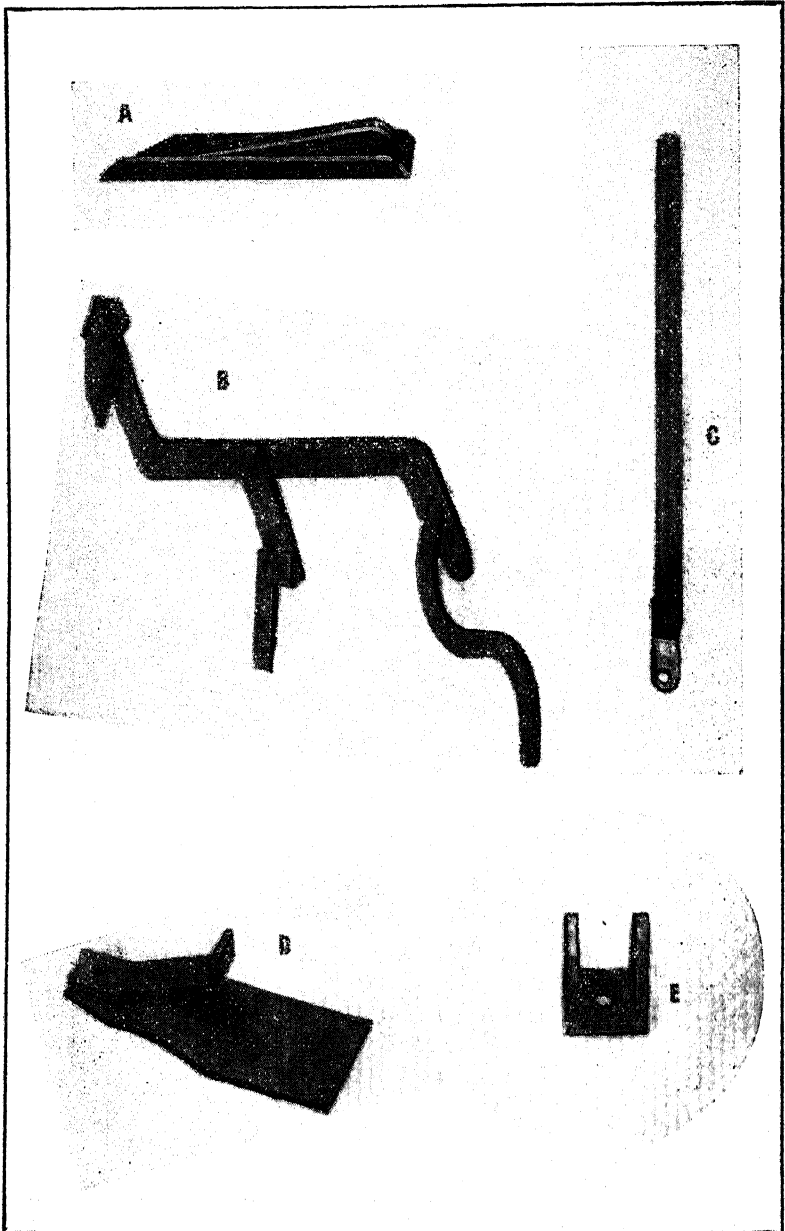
BRACKETS—(A) Cross-cut gauge for woodworker. (B) Saw guard bracket. (C) Saw clamp shaft. (D) Grader bracket for harvester. (E) Saw clamp bracket.
